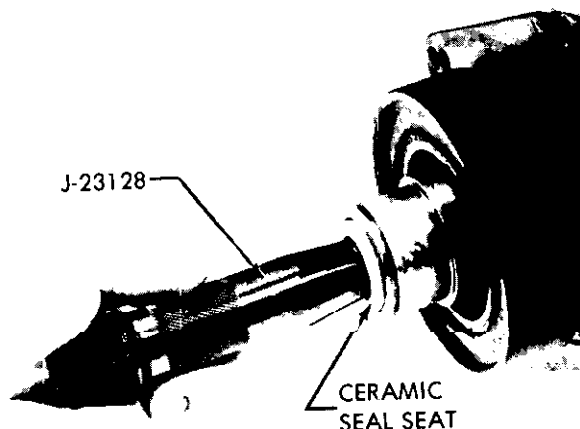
B-107 Removing or Installing Shaft Seal Seat Retaining Ring
